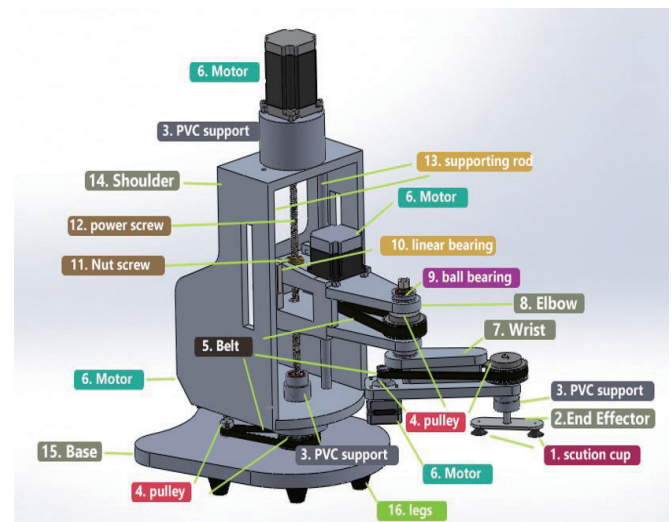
The CAD representation and a major component of the designed SCARA robot.
